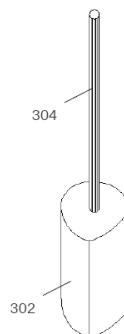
Drawing shows Circular stand (bottom stand can be of any shape)
